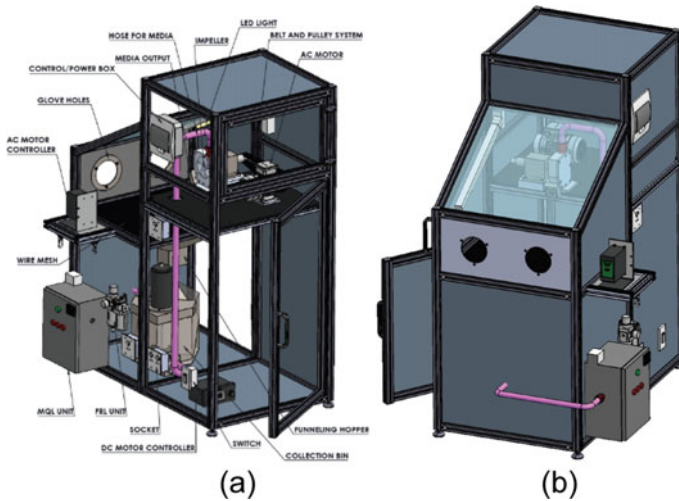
Labeled assembly with visible inside, assembled view of the completed machine
